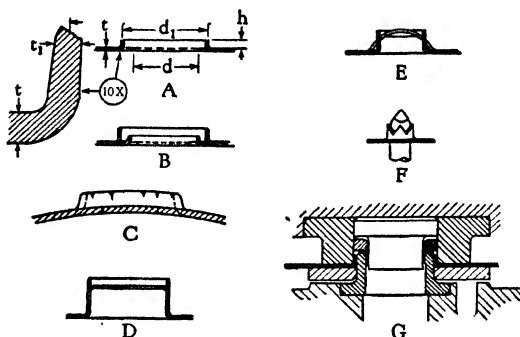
Burring or forcing out a flange around a hole may be performed in several ways according to the results desired.
